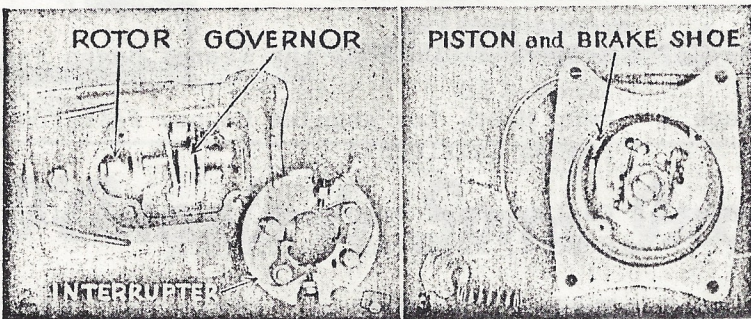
Distributor Rotor, Shaft and Governor in place. Interrupter plate also shown, ready to be installed. Two screws and rectangular washers hold it in place. Adjusting cap screw also shown. It is likewise seen in Fig. 5. Fig. 3. End view of centrifugal governor showing vacuum operated brake which retards spark for heavy loads
